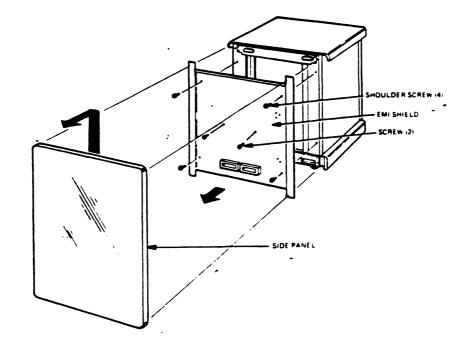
CABINET SIDE PANEL REMOVAL
